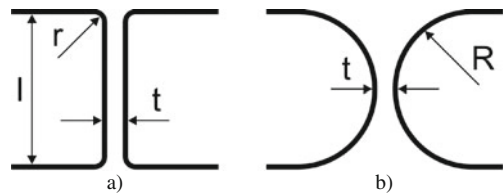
Design parameters of corner filleted notch (a) and right circular notch (b) flexure hinges
